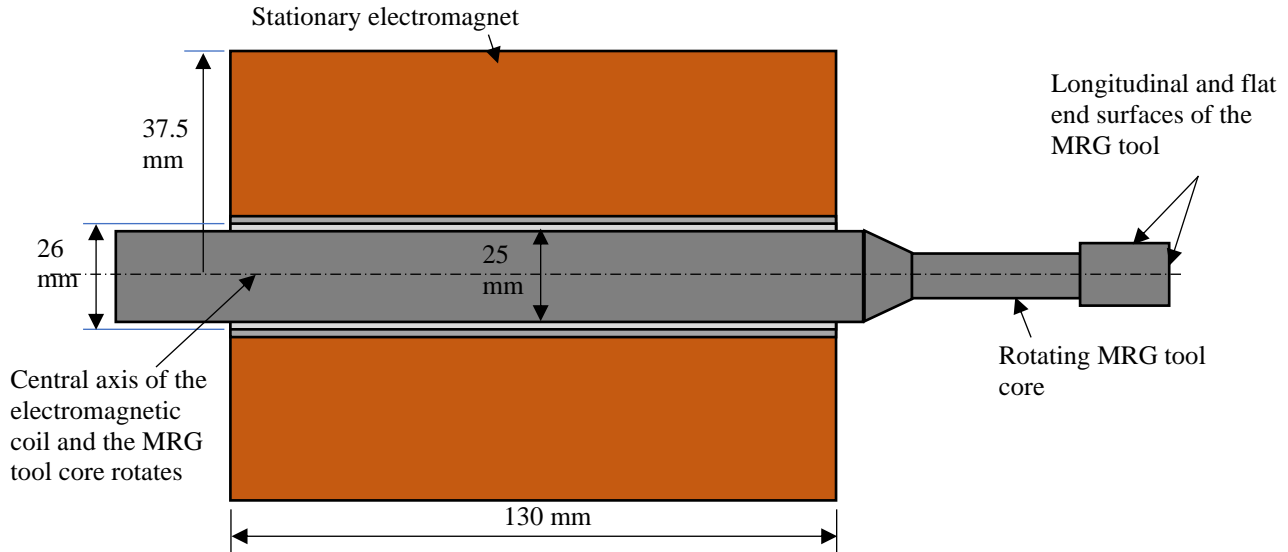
Dimensions of the electromagnetic tool coil along with the initial proposed MRG tool core without grooves on its finishing surfaces.
